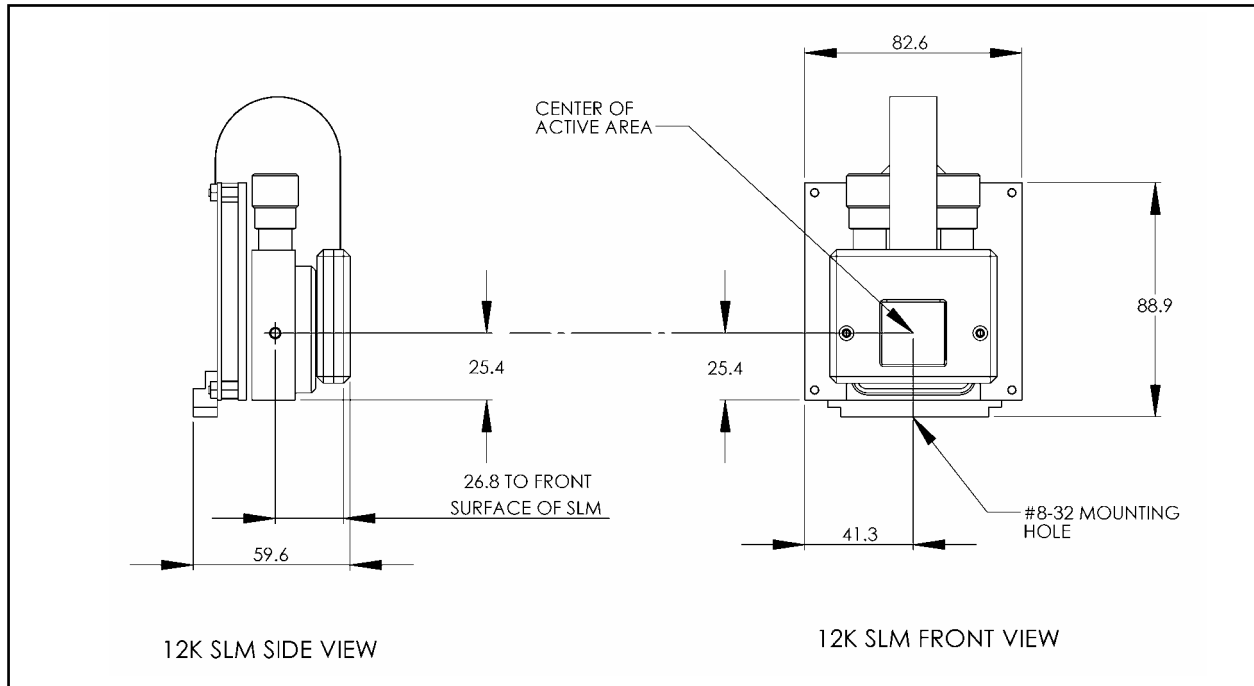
~ Outline drawing showing front and side views of 1x12,288 Optical Head.
